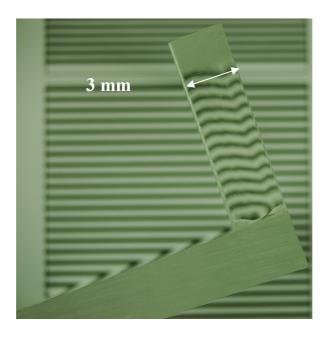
Filet weld in PMMA without additives using 1940 nm diode laser. The cross section is completely welded.
